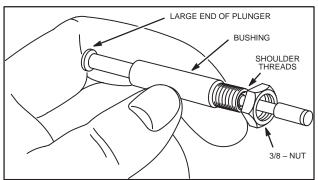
INSERTING PLUNGER INTO BUSHING
